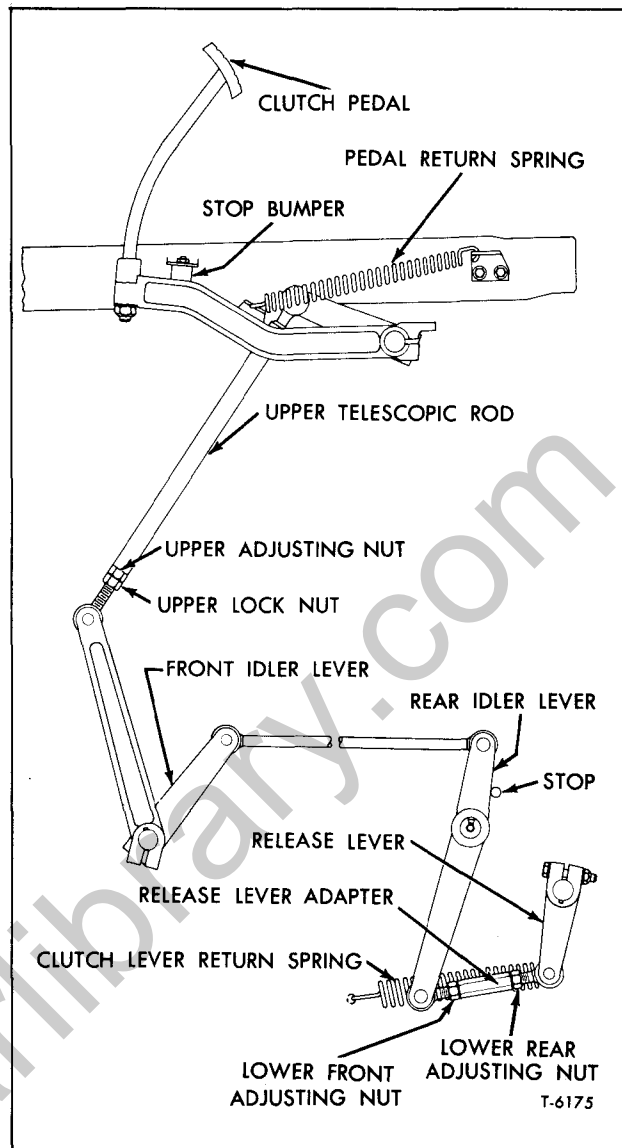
Series 90 Alum. Tilt Clutch Linkage (Equipped with Spicer Clutch)
